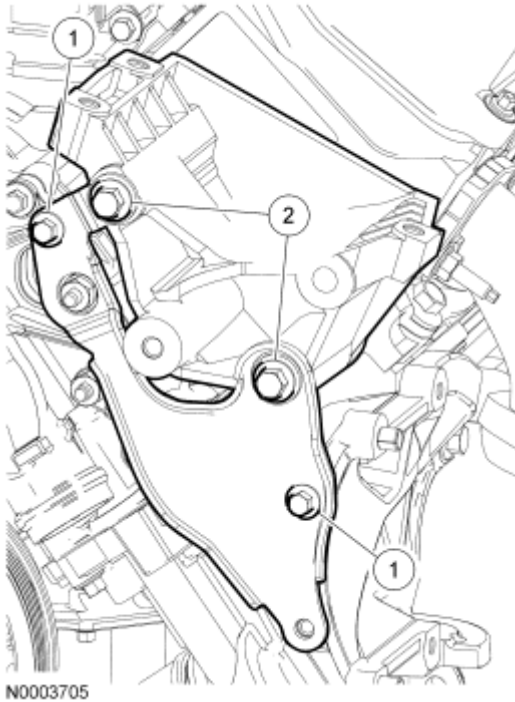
Installing A/C Compressor Mounting Bracket Brace And Generator Mounting Bracket
